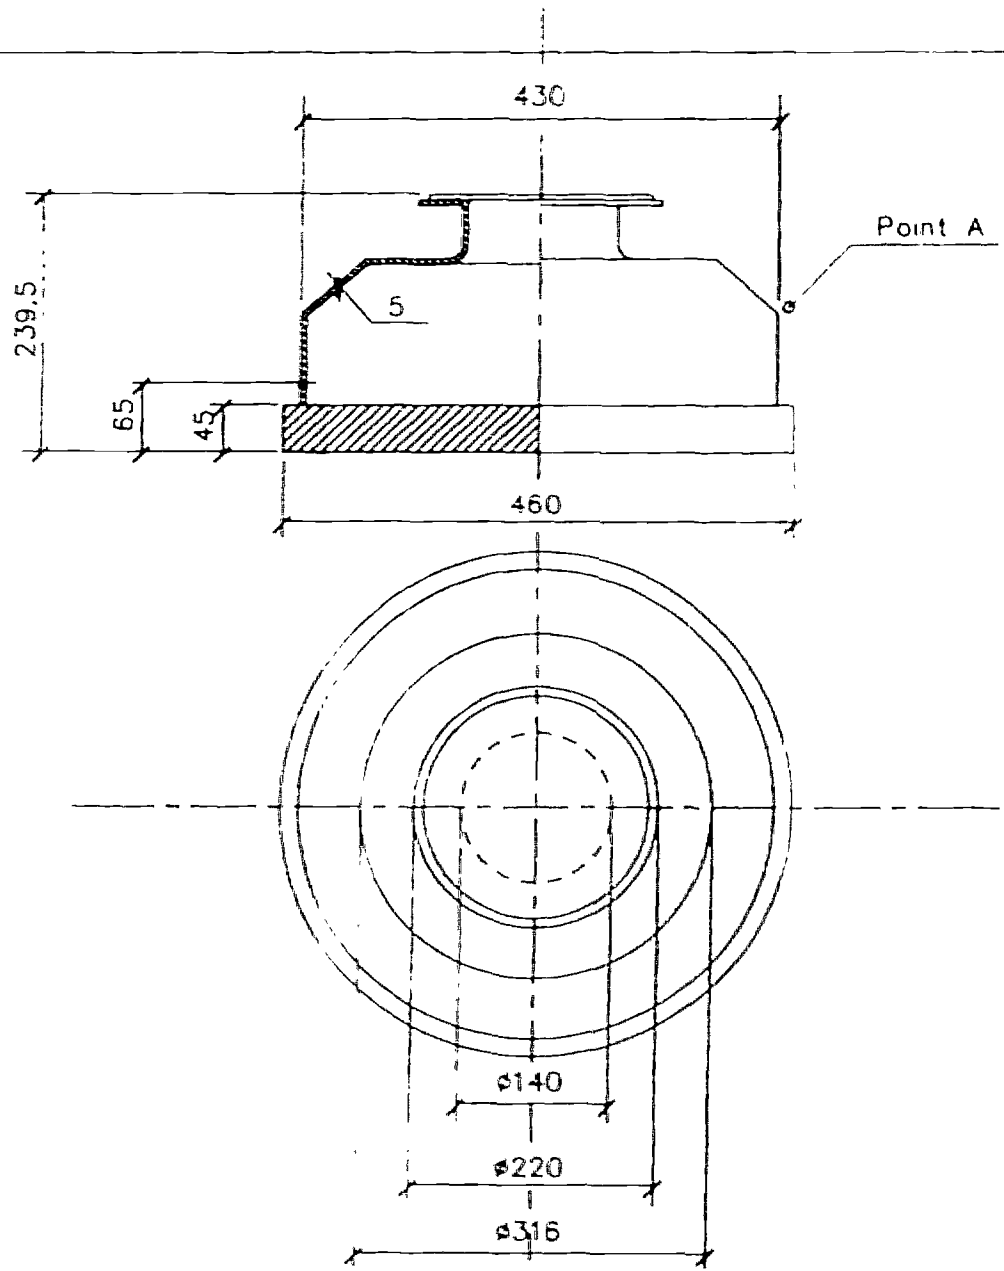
SPECIMEN GEOMETRY (Dimensions in mm).
